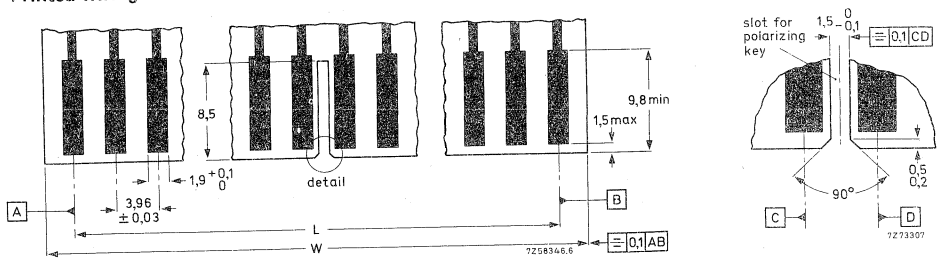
Recommended dimensions of the printed-wiring board; see Table 4 for dimensions L and W.
